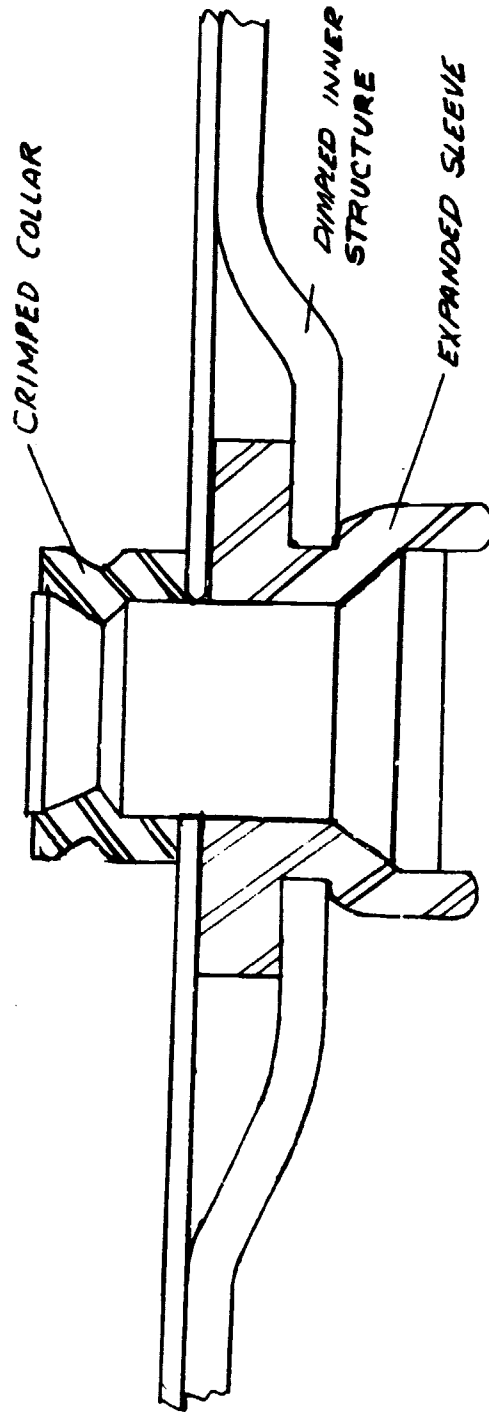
Expanded Sleeve Stud Retainer with Crimped Collar
